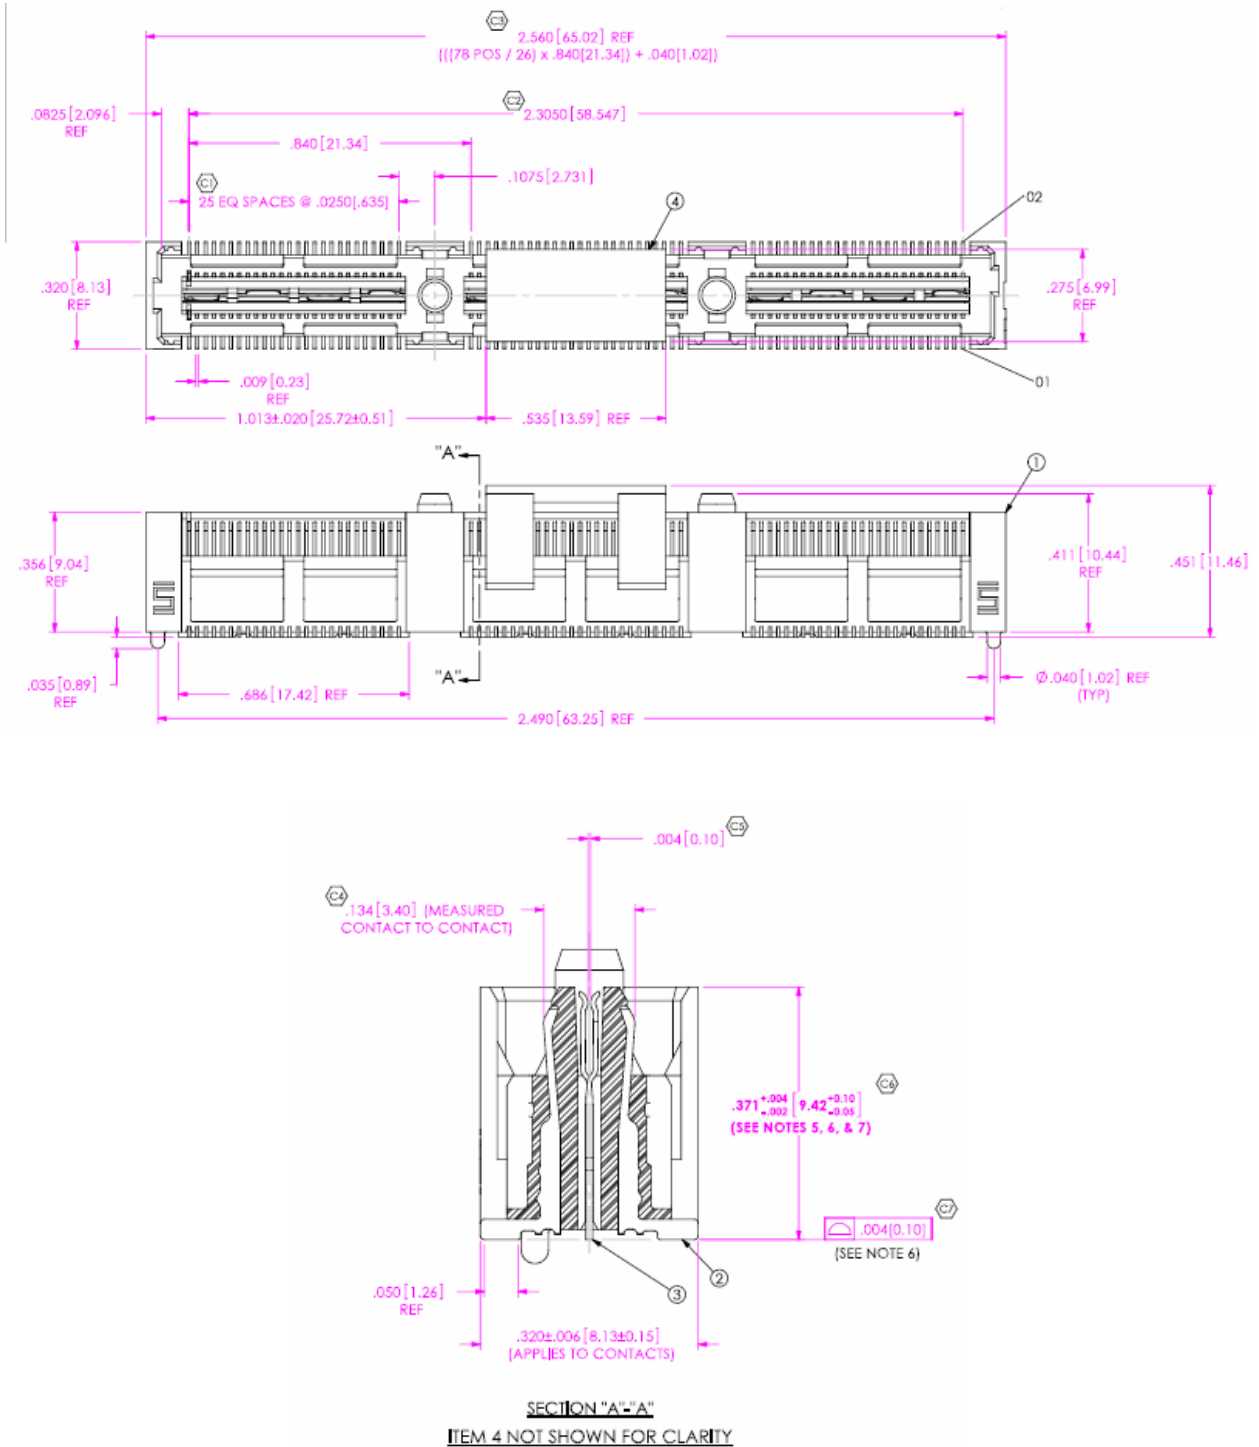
ASP-129646-03 or equivalent Mechanical Drawings
